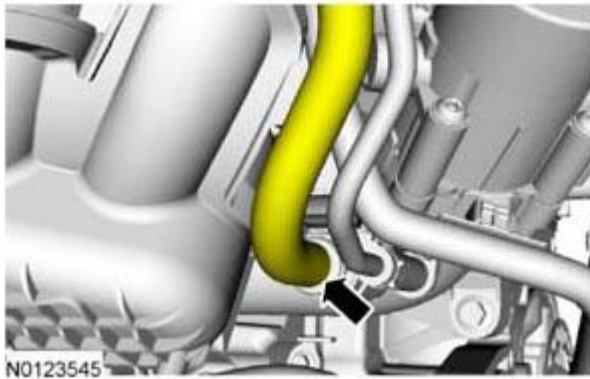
Locating Brake Booster Vacuum Tube From Intake Manifold
